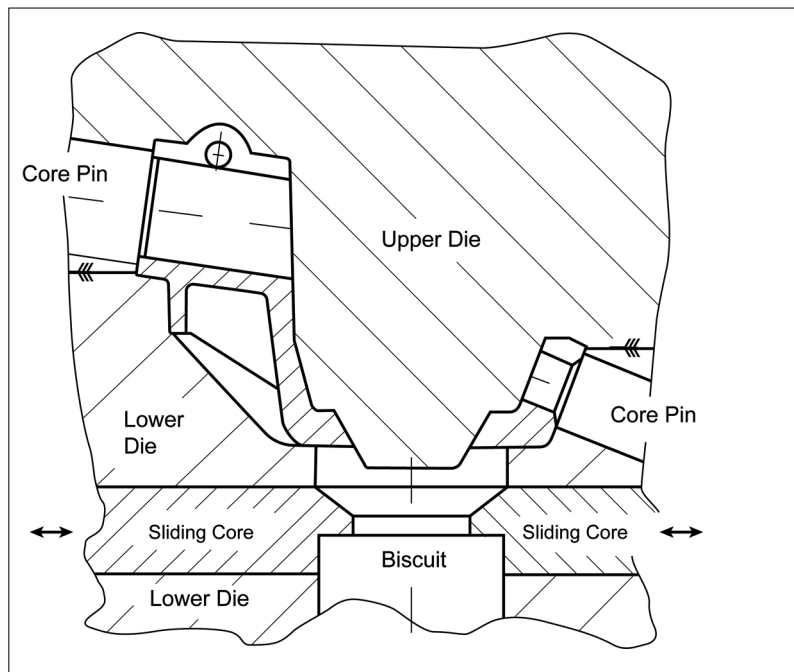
Die design for the casting of a knuckle on a VSC type machine, showing sliding cores in the lower die half [Str97].
